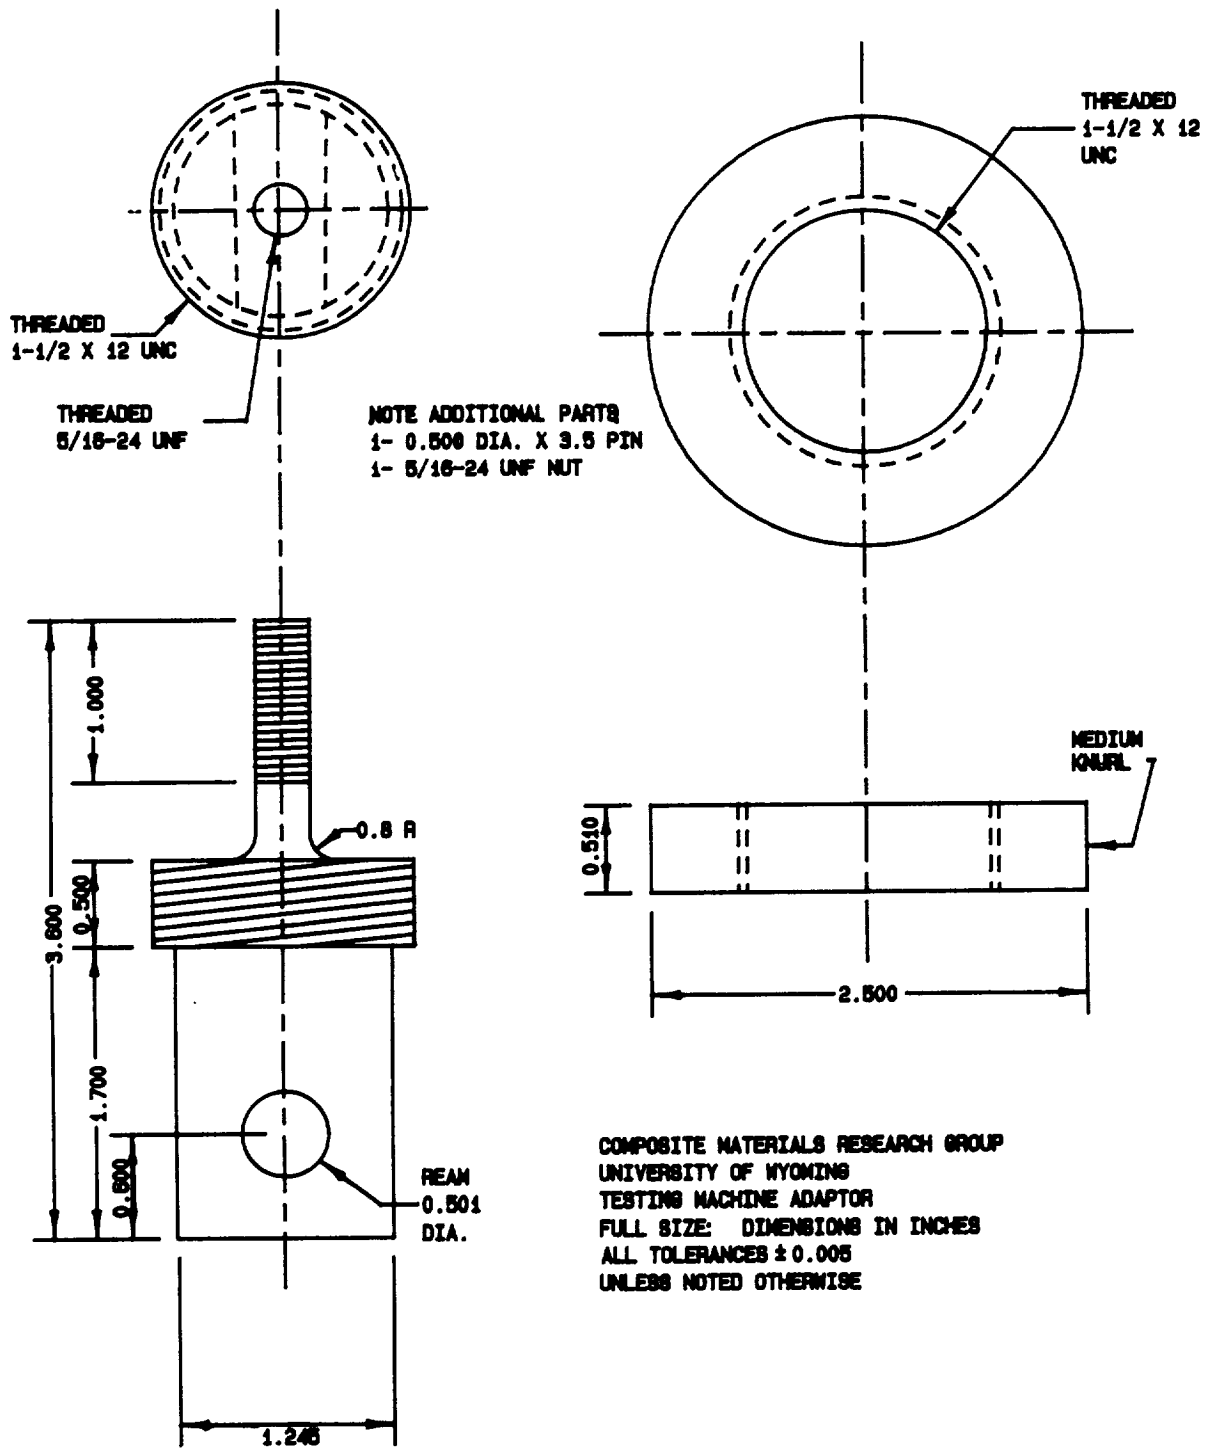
Iosipescu Shear Fixture Loading Adaptor.
